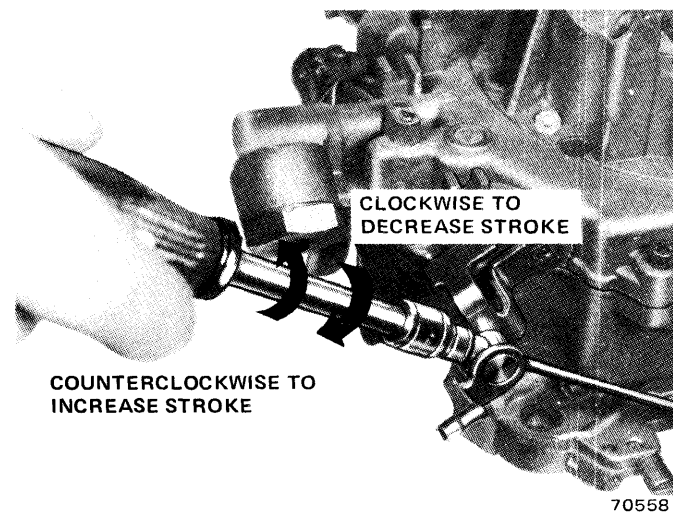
Adjusting Metering Rod Carrier Stroke
